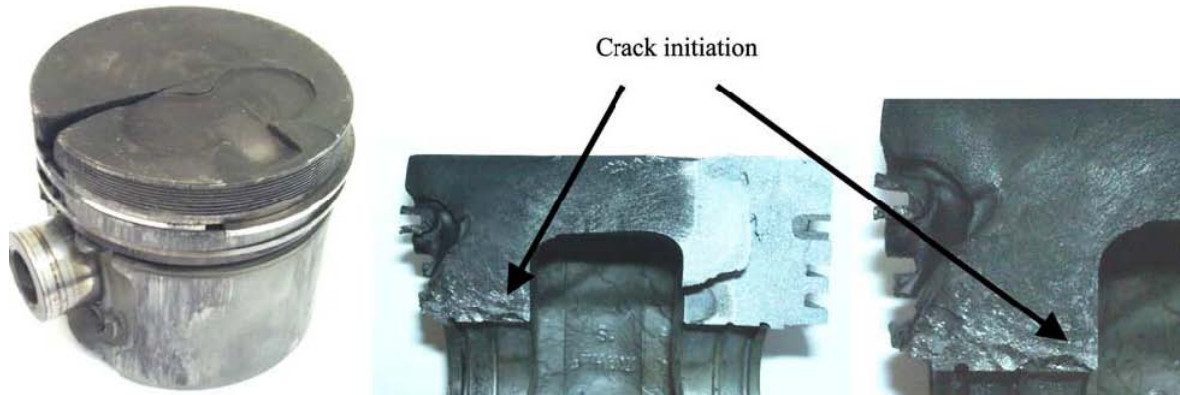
Petrol engine piston with a crack from one side of the pin hole to the head.
